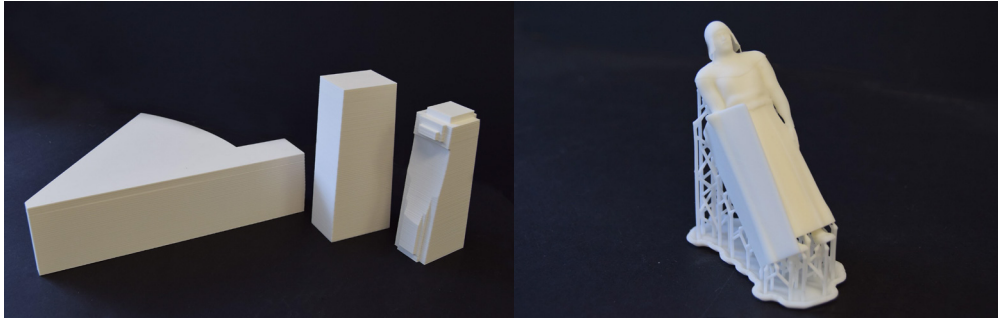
Parts of the monument printed with FDM 3D printing technology on the left and a model of a soldier printed with stereolithography on the right
